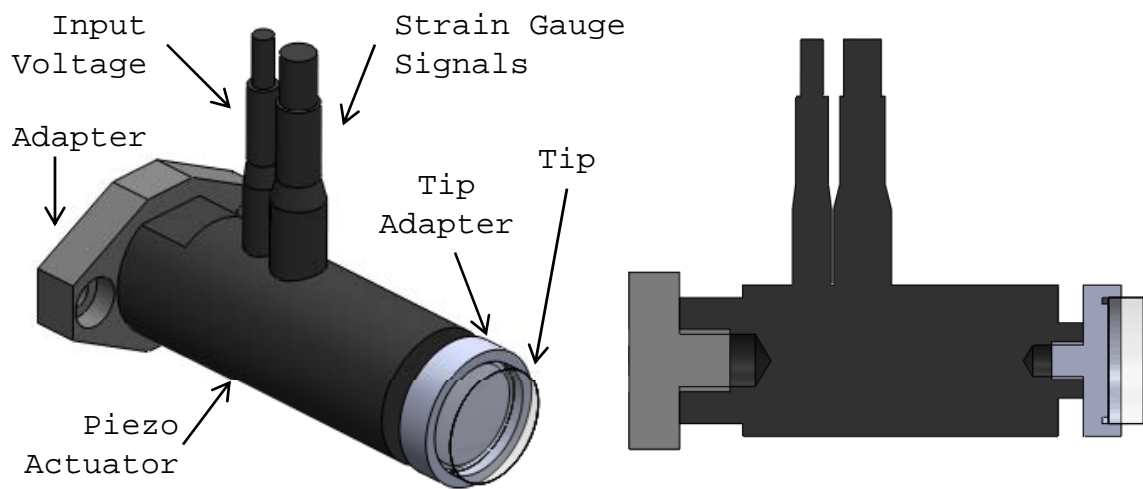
CAD model of the actuator used for exerting the pushing force on the reticle.
